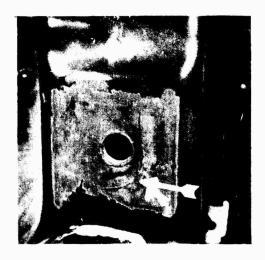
Arrow Denotes 1-1/4-Inch Crack On Rear-Differential Right Rear Mounting Bracket On M151A1 after 25,276 Test Miles.
